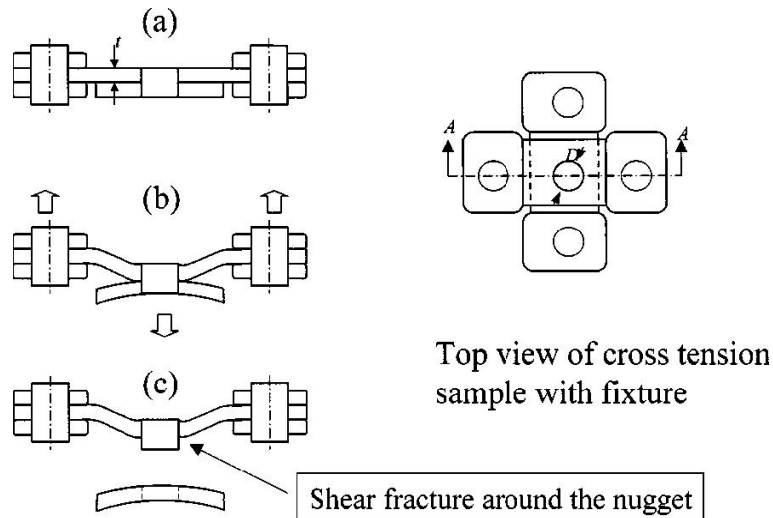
Deformation pattern and weld nugget pullout failure of a cross tension sample [55]
